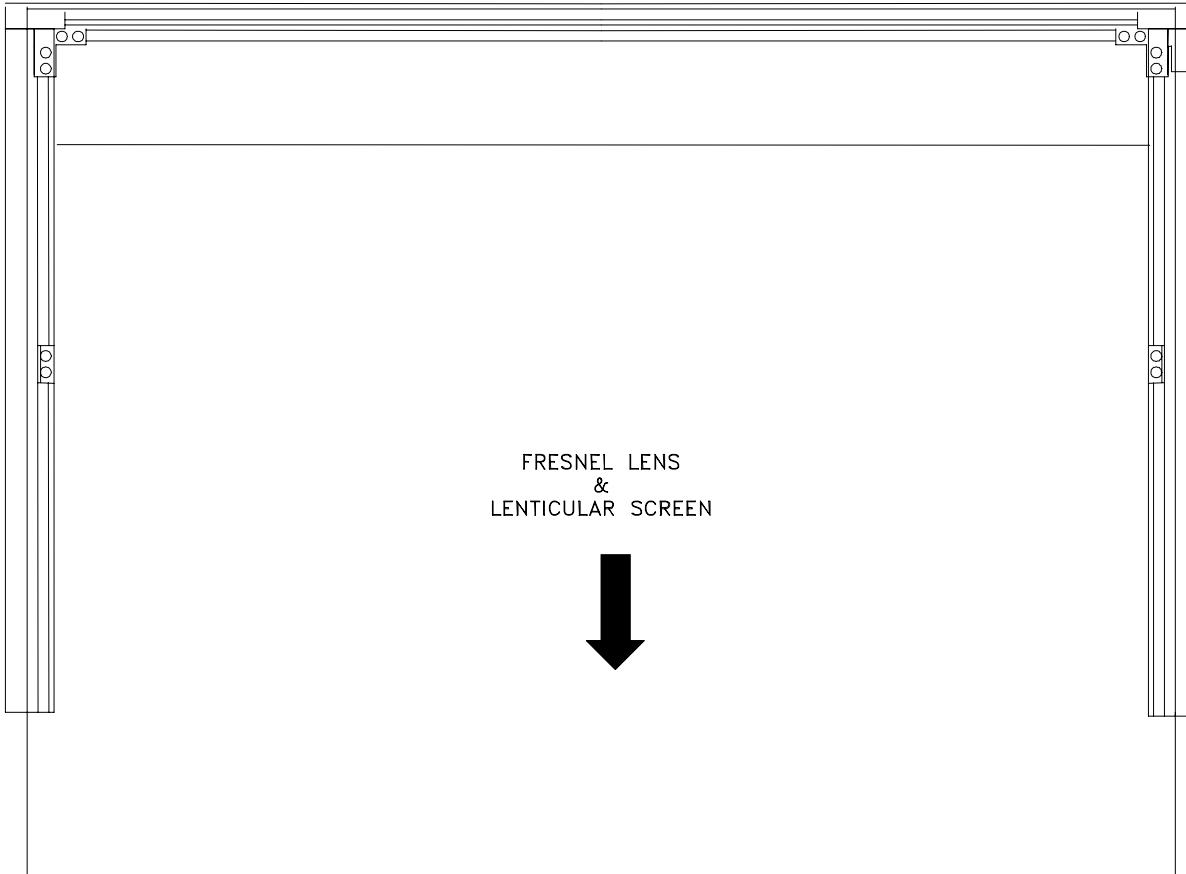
Lenticular Screen & Fresnel Lens Removal (Rear View)
